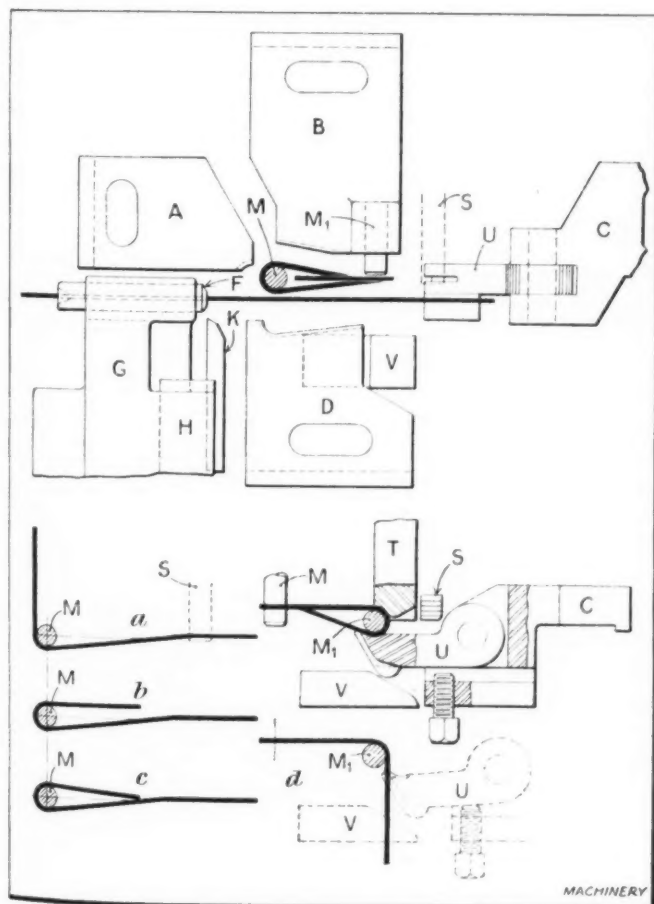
Tool Set-up Used on Four-slide Wire-forming Machine for Producing Link Z, Fig. 1
